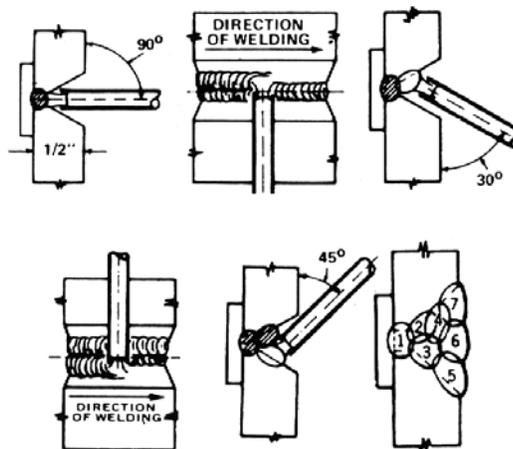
Multilayer Deposit. Horizontal Butt Weld
